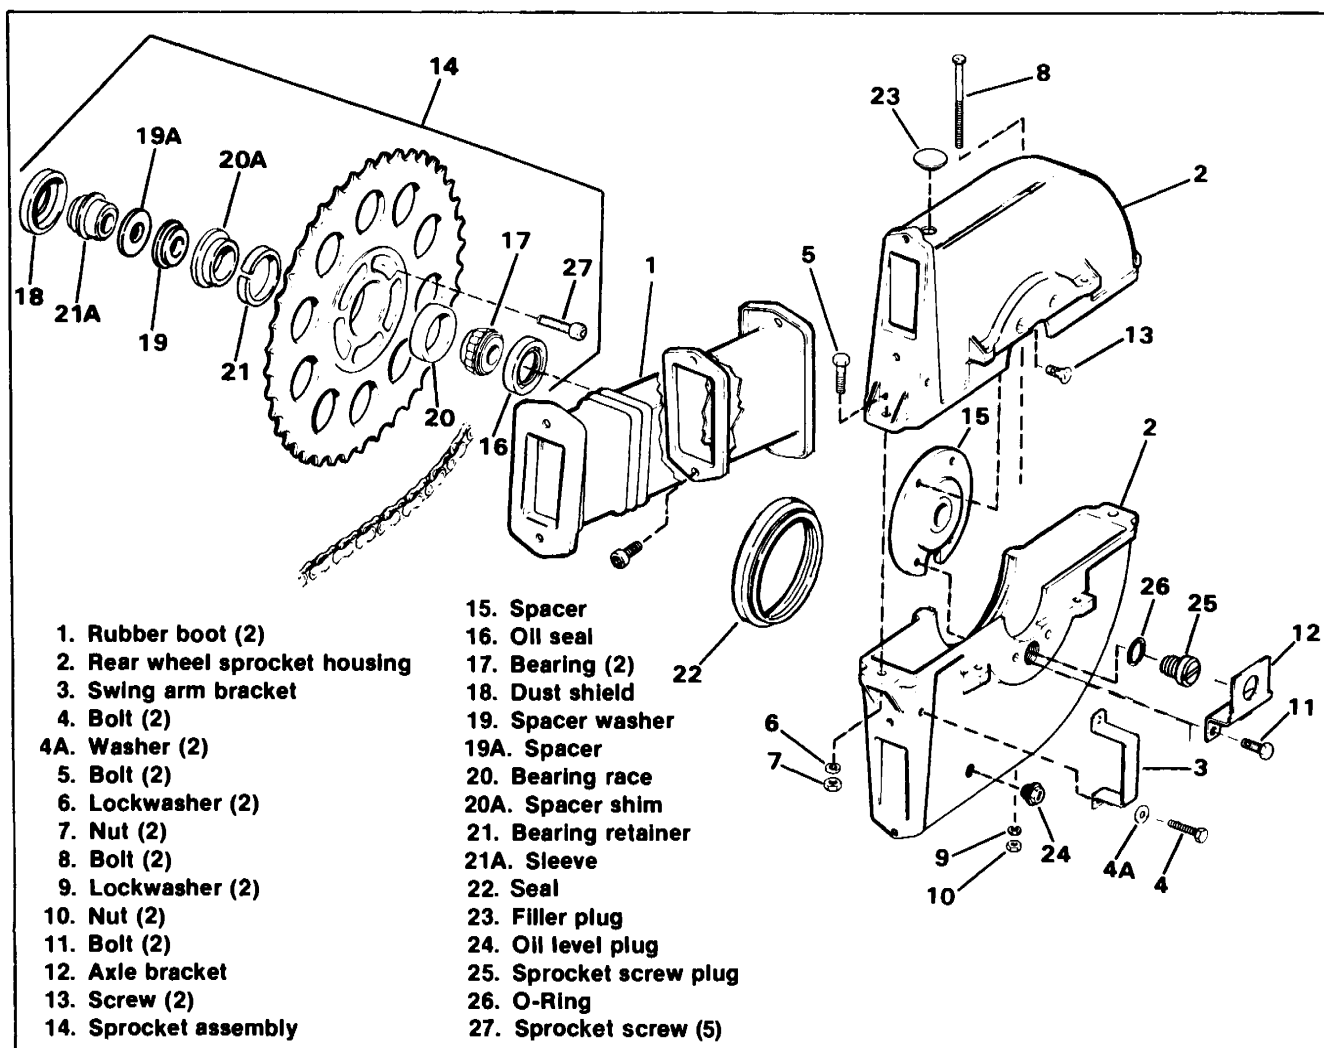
Rear Wheel Sprocket and Housing Enclosed Rear Chain
